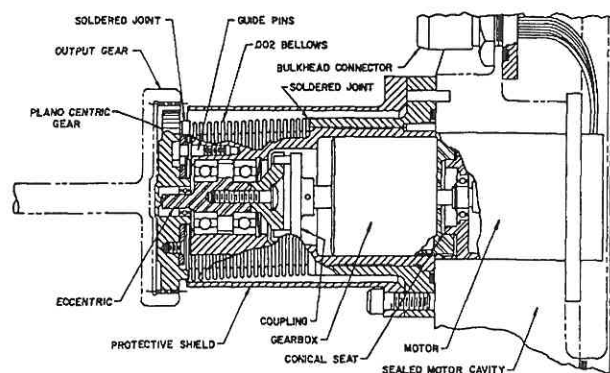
Planocentric drive assembly showing the synchronous motor, gear box, and eccentric that drives the planocentric pinion. The cam is attached to the shaft of the output gear.
